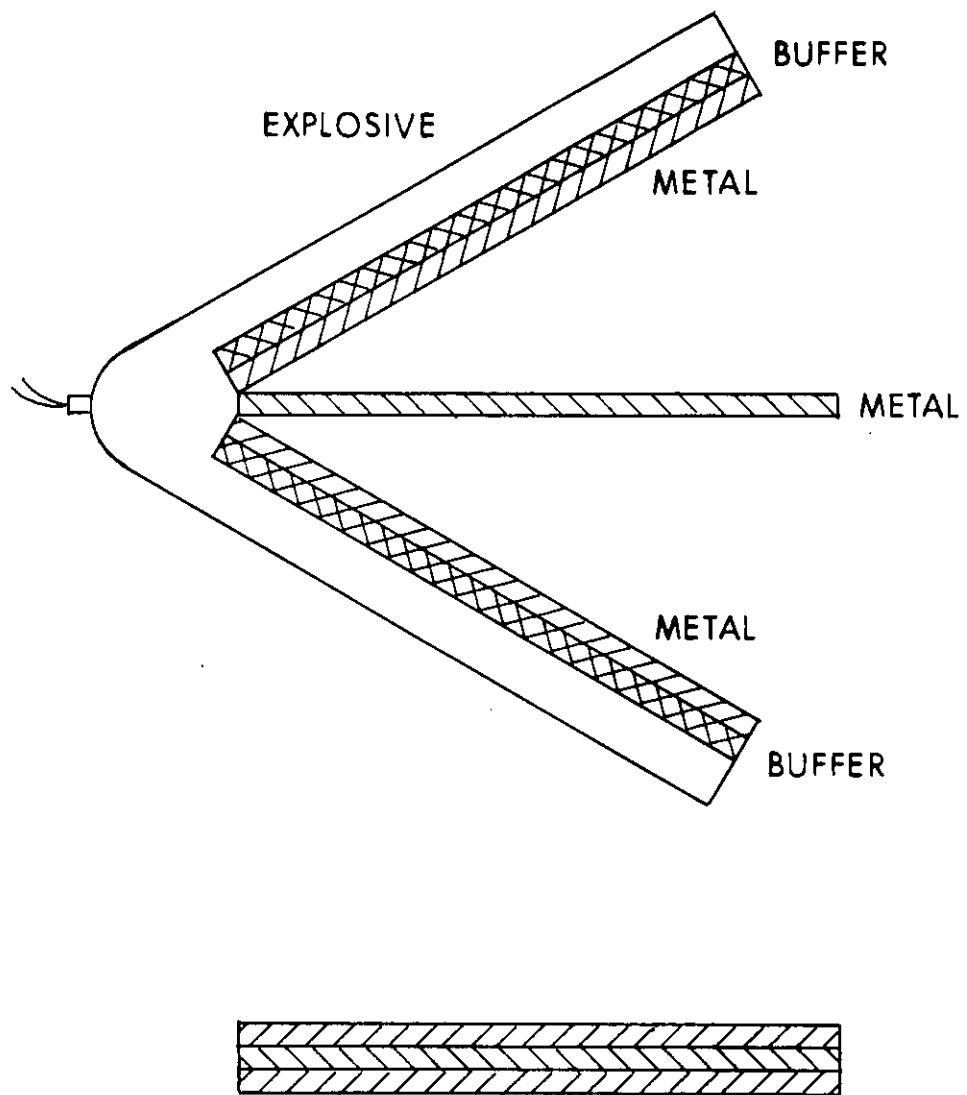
Explosive Welding, a Three Layer Weld (Sandwich).
